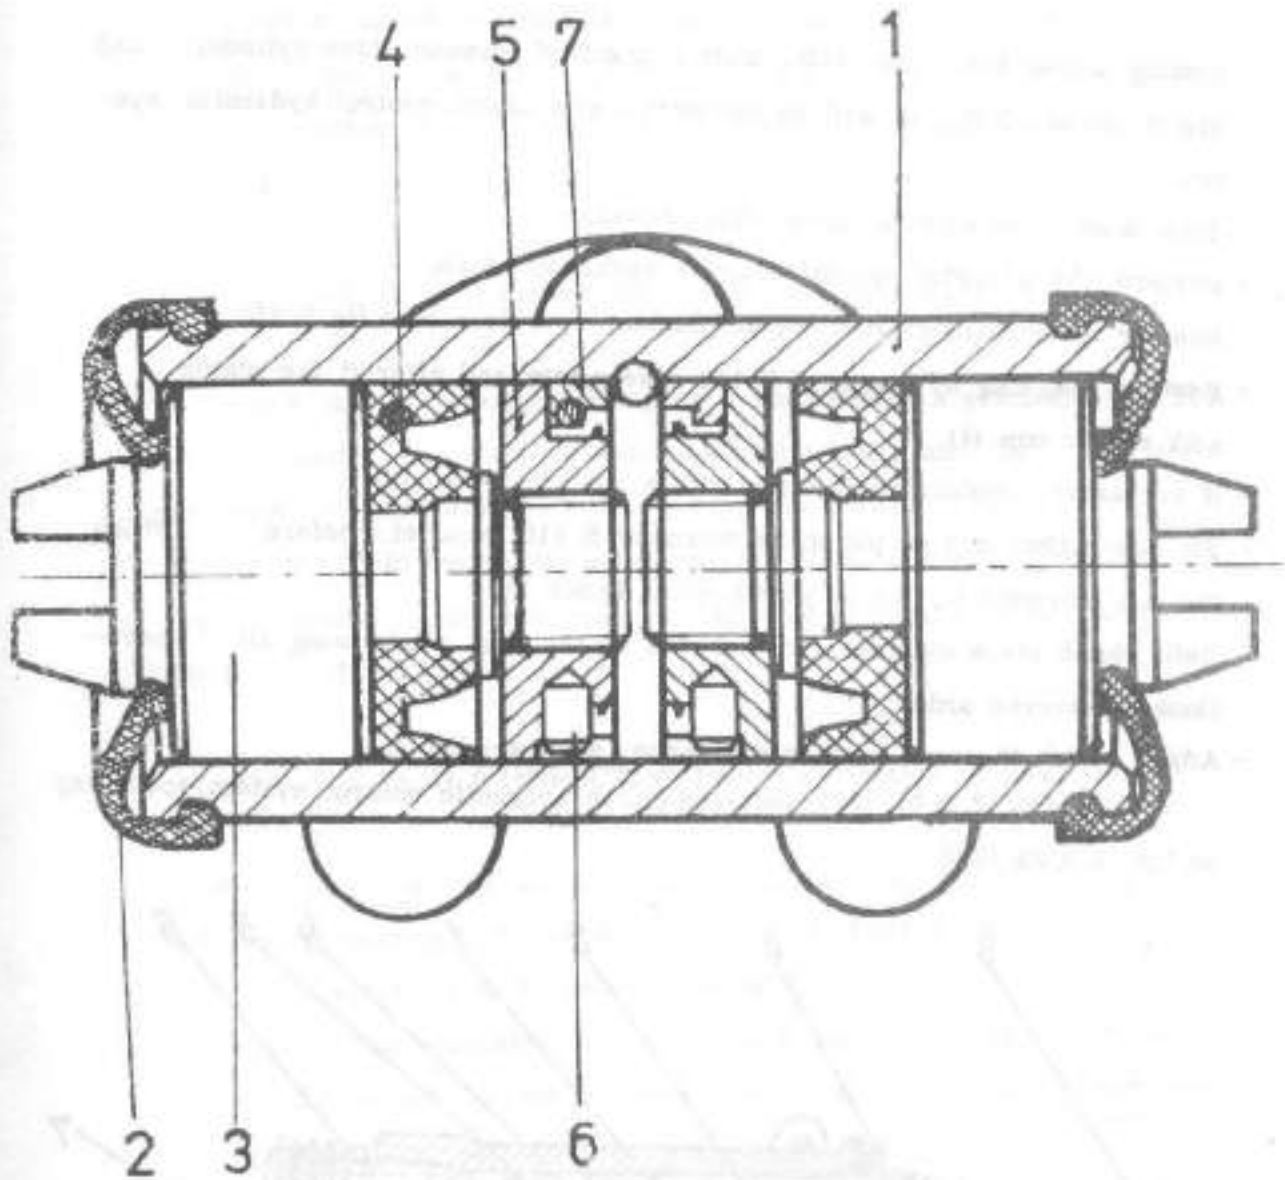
45. REAR WHEEL BRAKE CYLINDER
